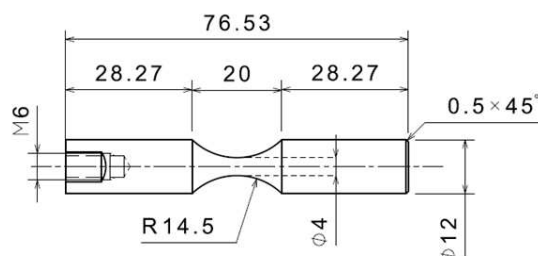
Geometry and dimensions of ultrasonic fatigue test specimen
